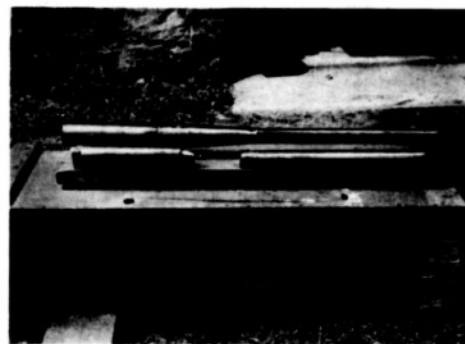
Steel tube pulse jet (Mark I) disassembled.
